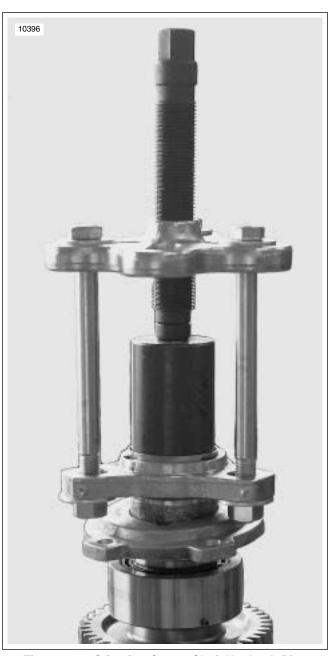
Crimping Output Shaft Nut Lock-Ring
